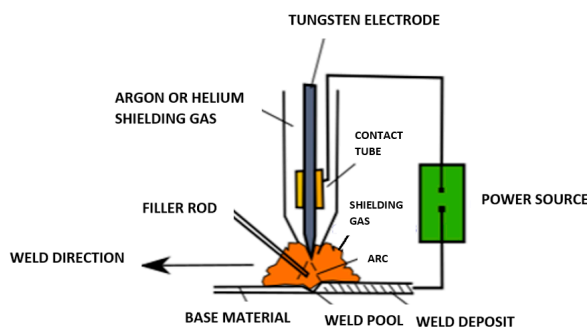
Schematic diagram of tungsten inert gas (TIG) welding incorporated with a filler rod.
